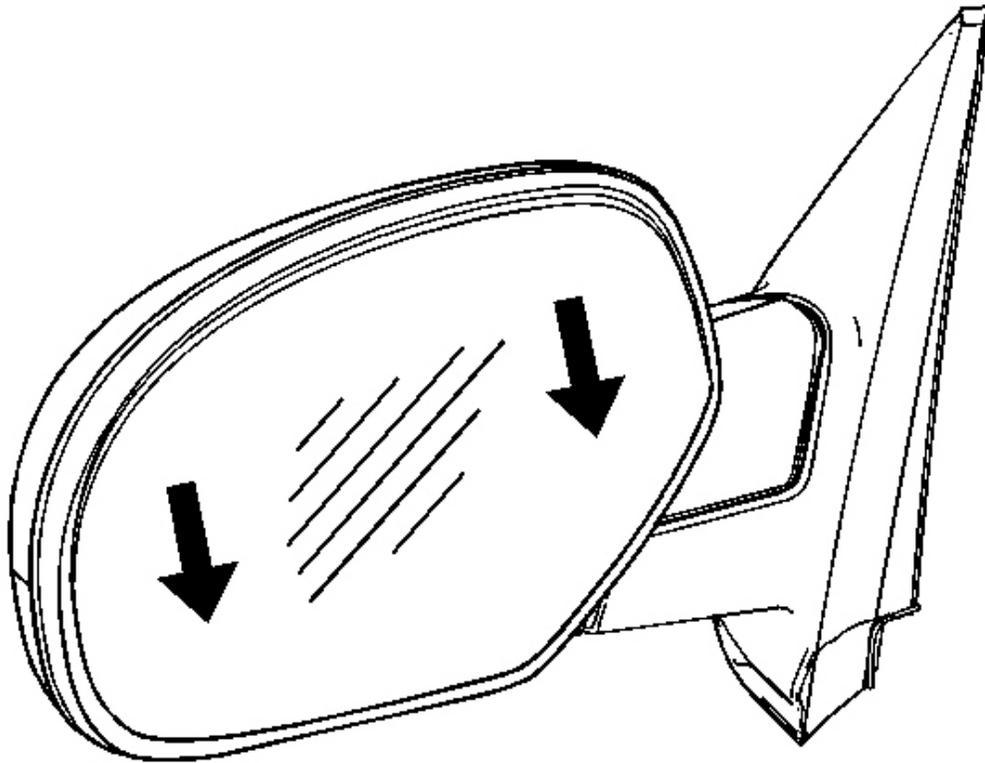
Identifying Bottom Outboard Corner And Top Inboard Edge Corner
